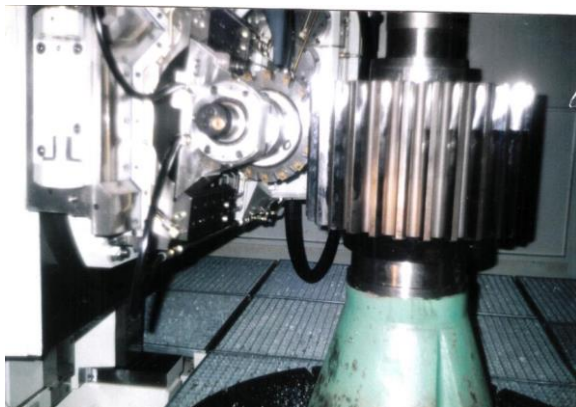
The pre-treatment with a gear blade for a hardened gear wheel
